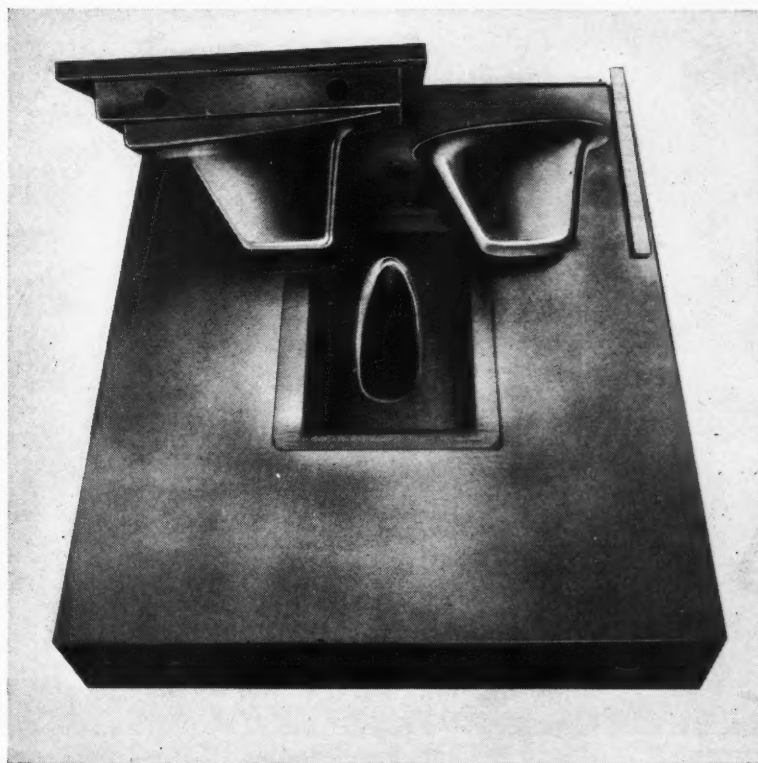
Blank and incompletely formed part shown with preliminary tooling used in the multiple-stage drawing of a rocket fairing
